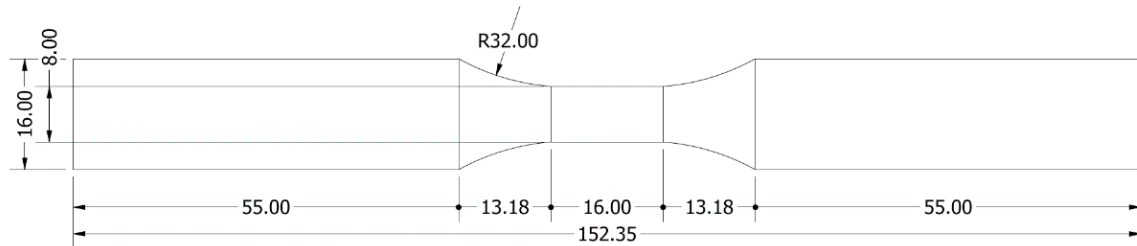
Fatigue and tensile specimen geometry (round) with dimensions in mm according to ASTM E606
